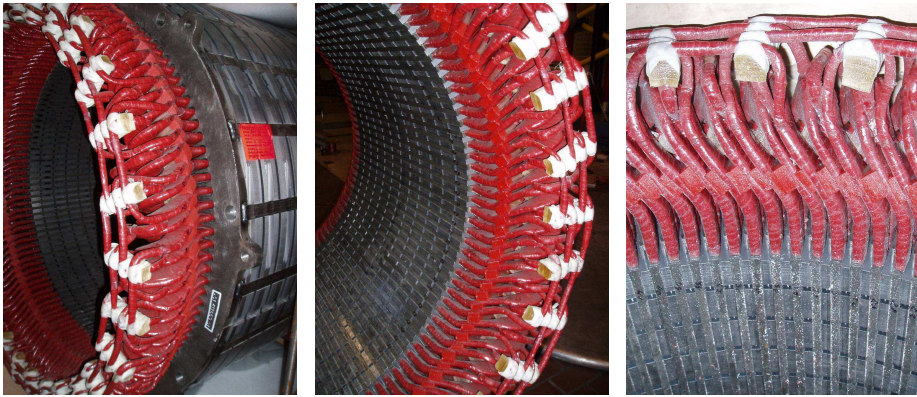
The stator core and winding of a several-megawatt motor, with the rotor removed.
